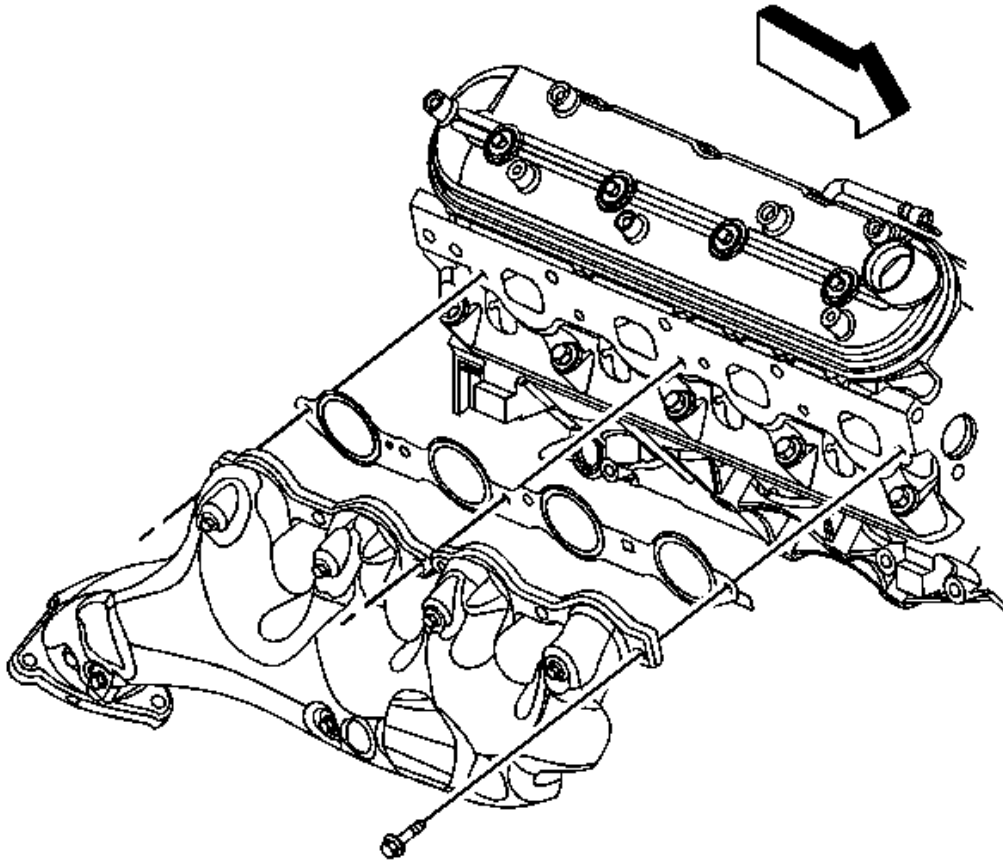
View Of Exhaust Manifold, Gasket & Bolts
